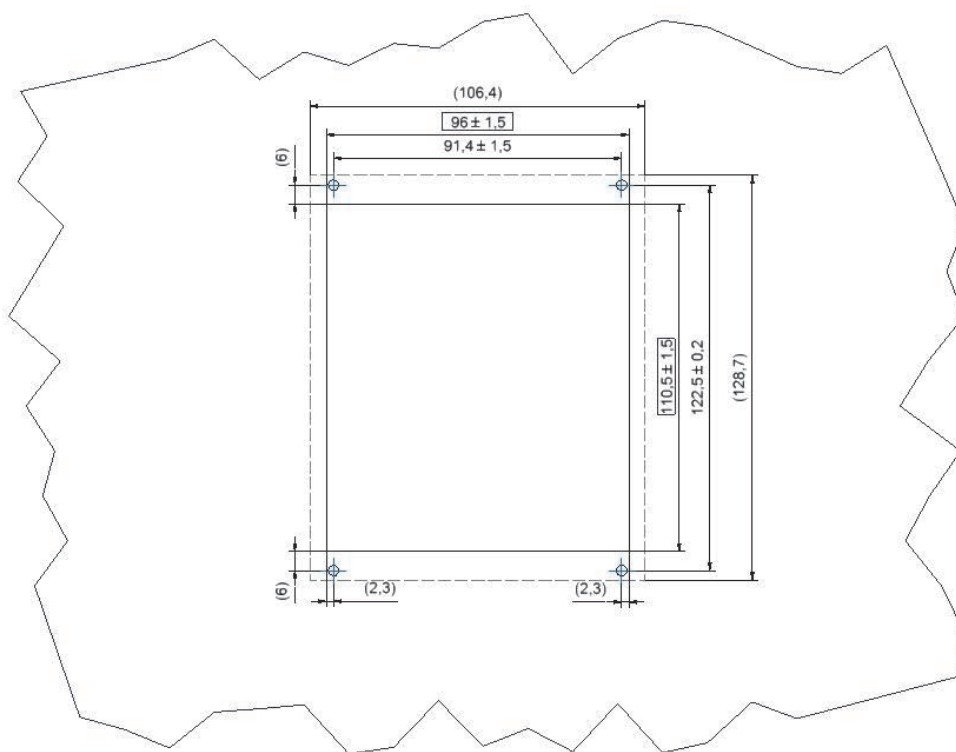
Dimensions of panel cutout (VAR02/03).
